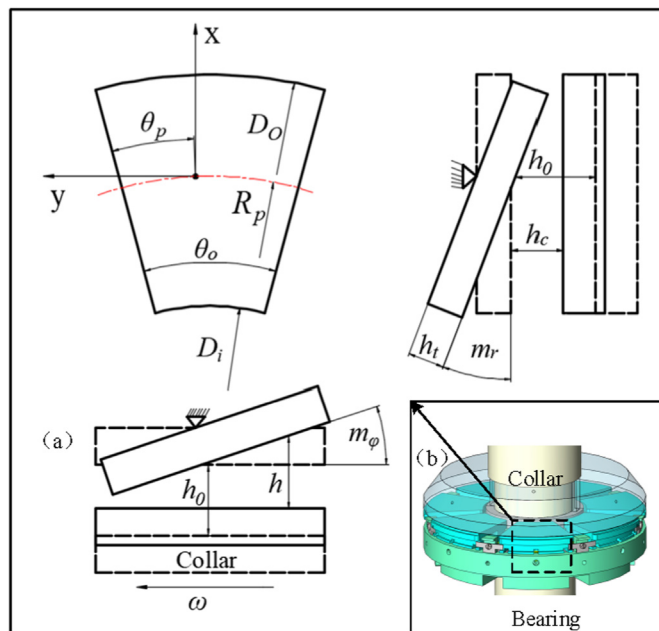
A point-pivoted TPTBs construction (a) The geometry of the pad and the oil wedge (b) Collar and bearing assembly 3D model.
